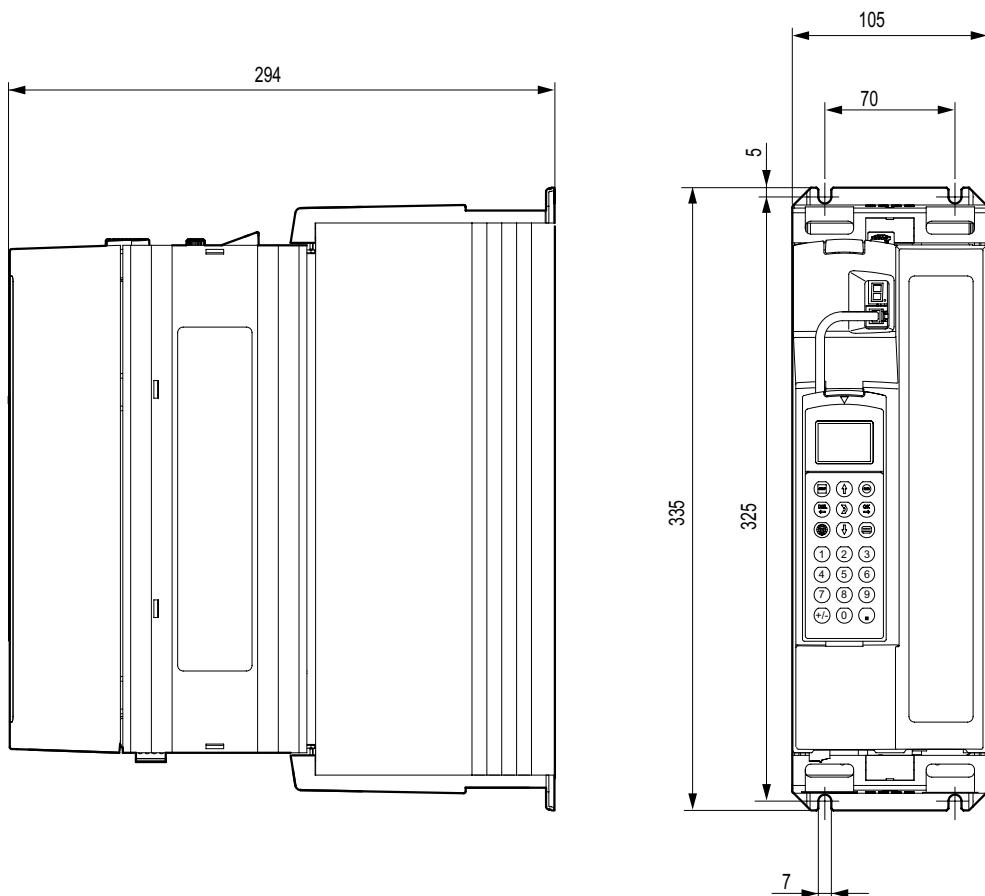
Dimension drawing for MDX61B size 1, dimensions in mm
